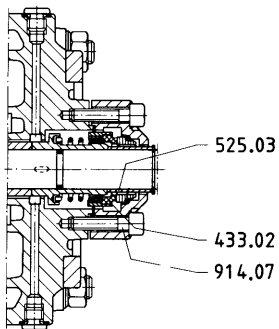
Sizes L 25/32/40 (pressure side), mechanical seal, balanced, uncooled, version U2D/U2.2D (pressure side = anti-clockwise rotation), with flushing
